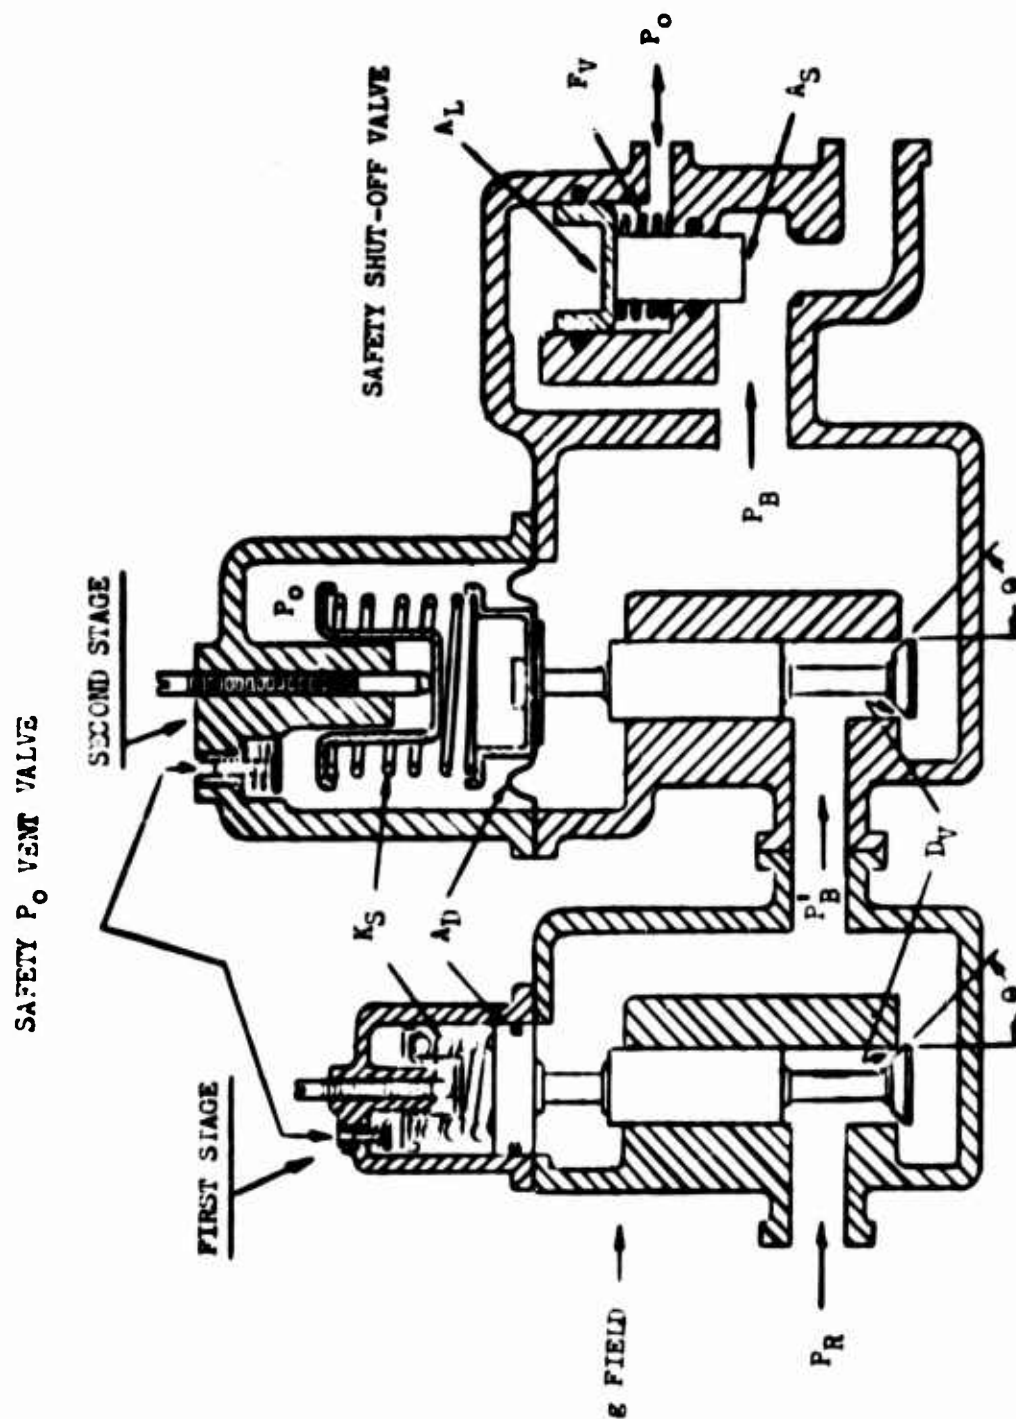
Rotor Tip Fuel Control - Inlet Throttling Regulator.
